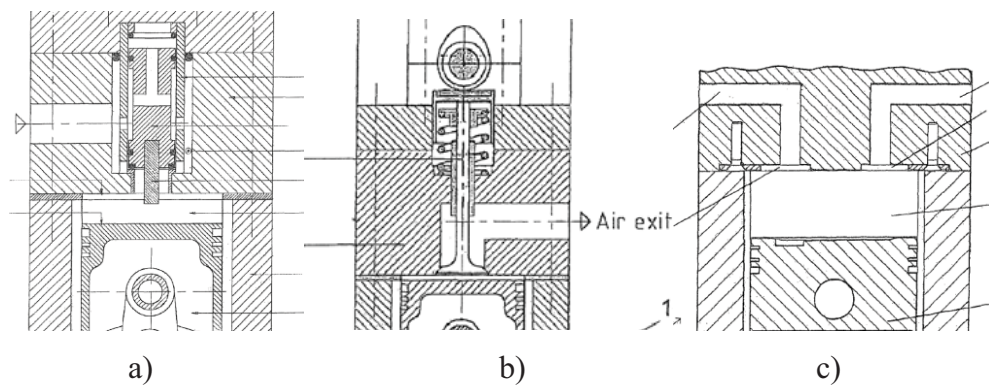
The three specific valves of the Truglia motor a) Inlet valve, b) Exhaust valve, c) Anti-return valve
